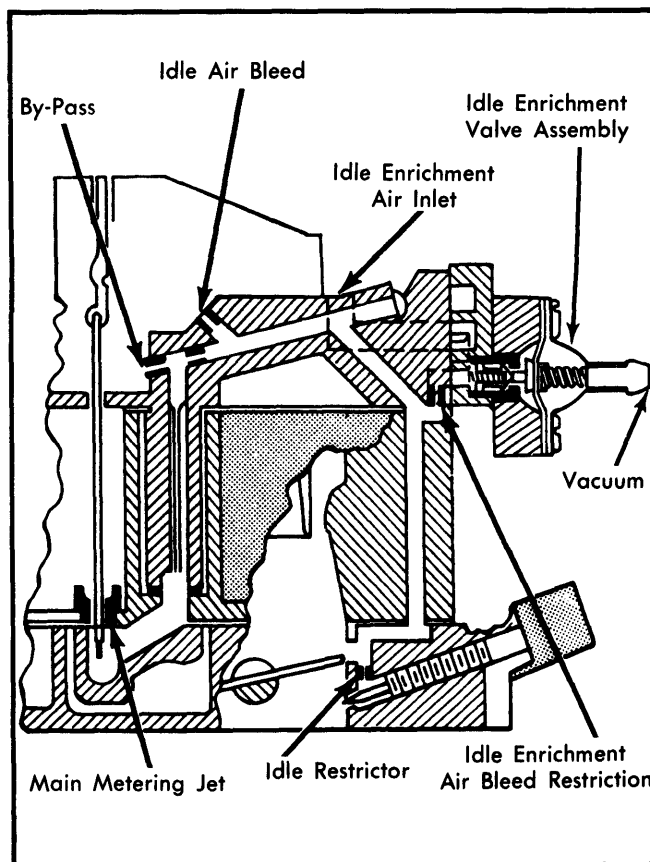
Sectional View of Chrysler Corp. Idle Enrichment System
